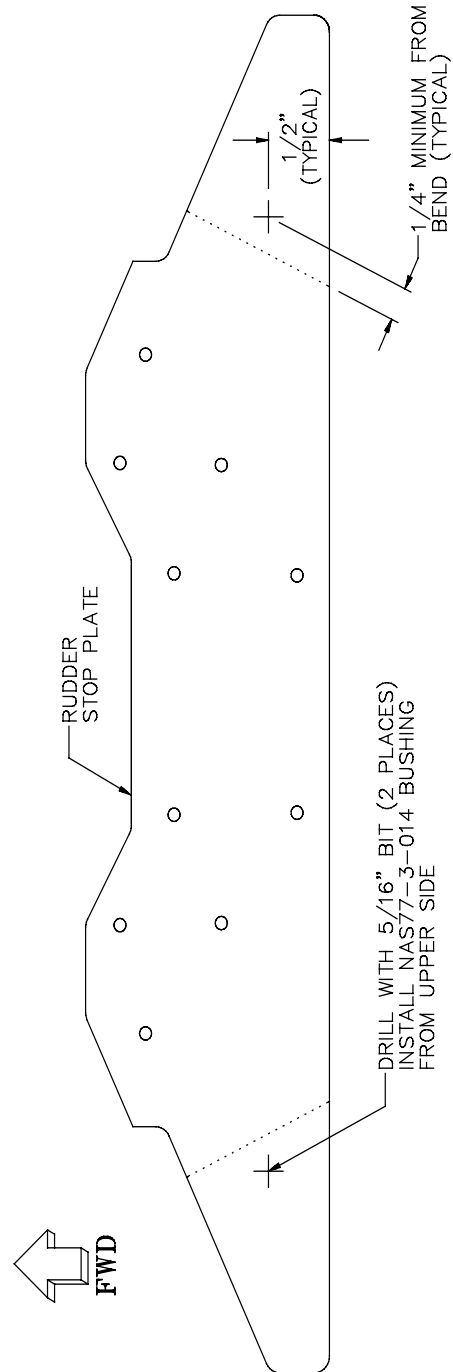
Drilling Holes for the Tailwheel Steering Cable Bushings (Taildragger Only)
